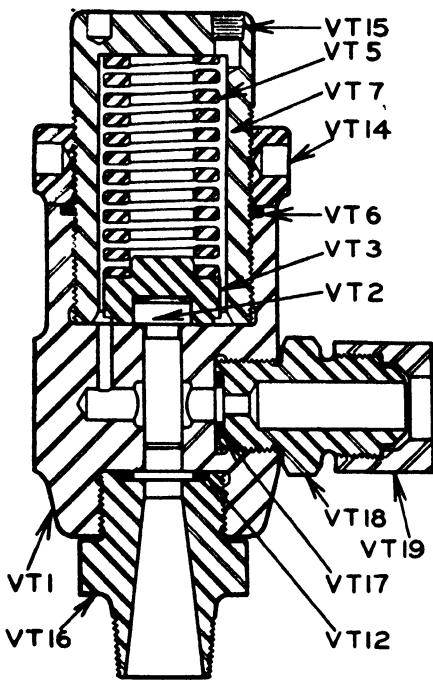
Spring-loaded plunger-type relief valve. (*Hydro-Power Inc., Mount Gilead, Ohio.*)
